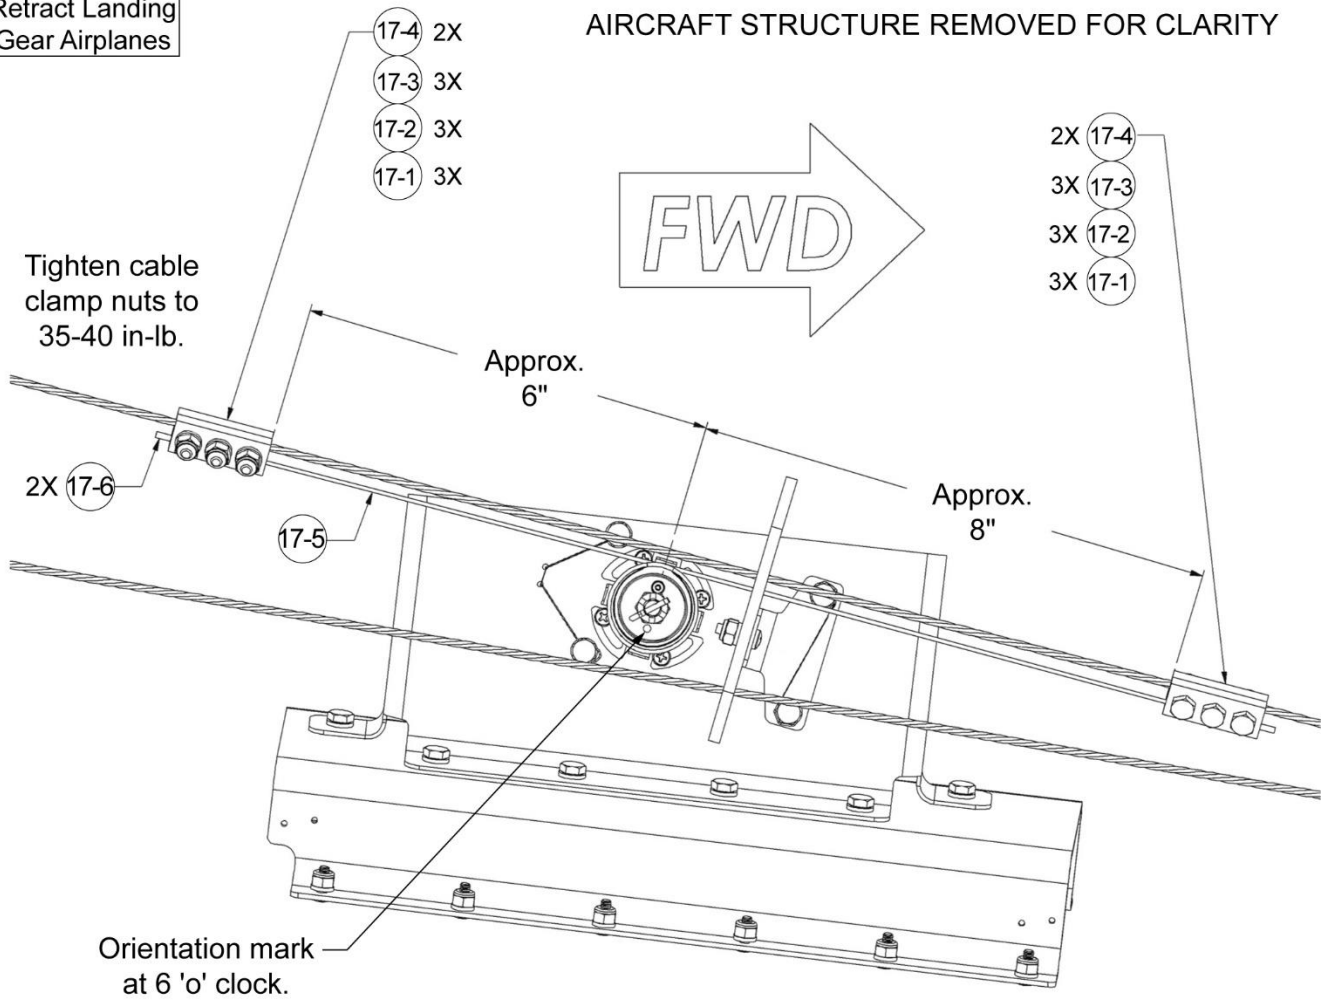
Attaching Bridle Cable to Elevator Control Cable
